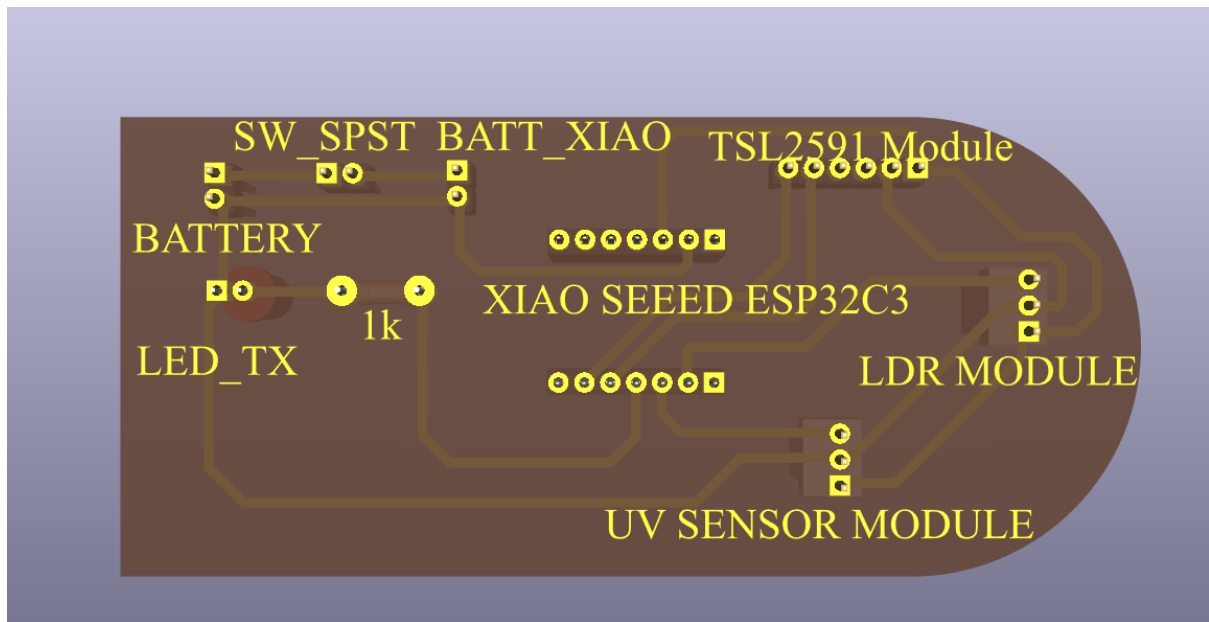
PCB In 3d Bottom View in Kicad PCB Editor
